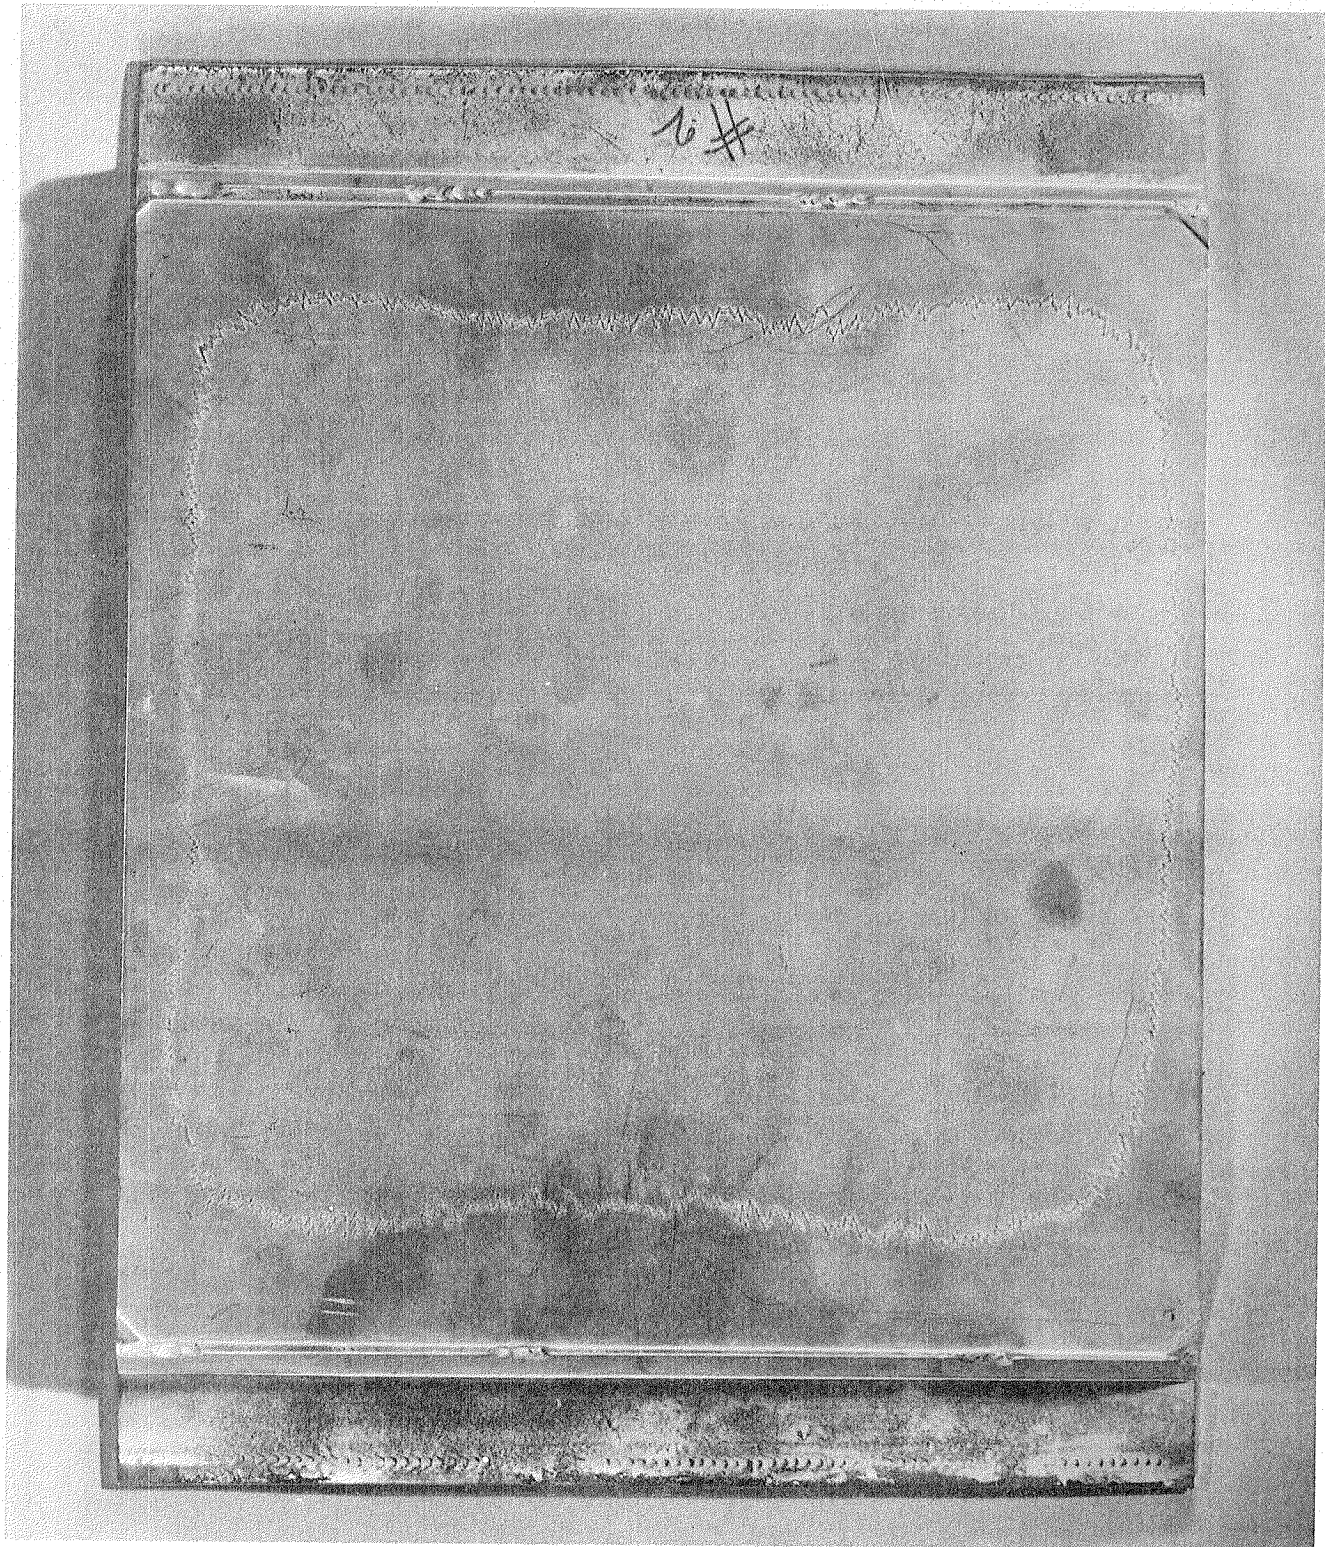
PANEL NO. 2 BOTTOM FACE SHEET
